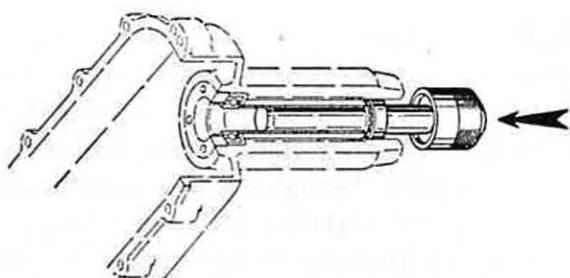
Ball Race Assembly Tool, Part No. 0018128.
